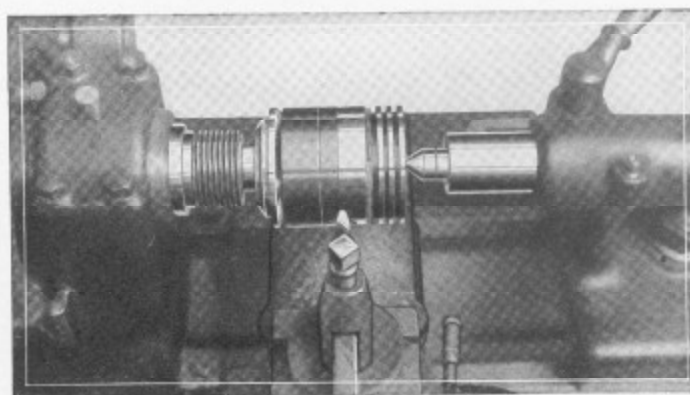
Taking a Finishing Cut on a Semi-Machined Piston Mounted on the No. 44 Piston Adapter in the Lathe
